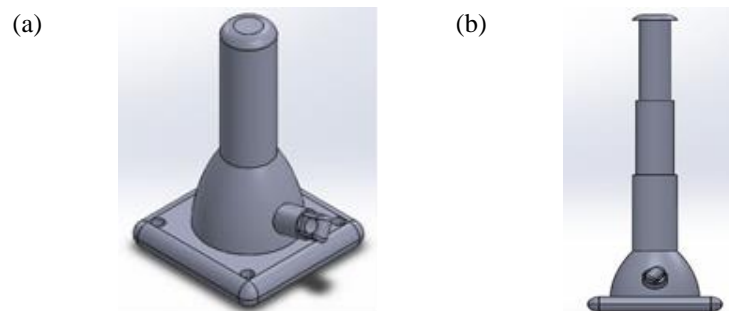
Mechanical Jack. Fully (a) retract; (b) extend
